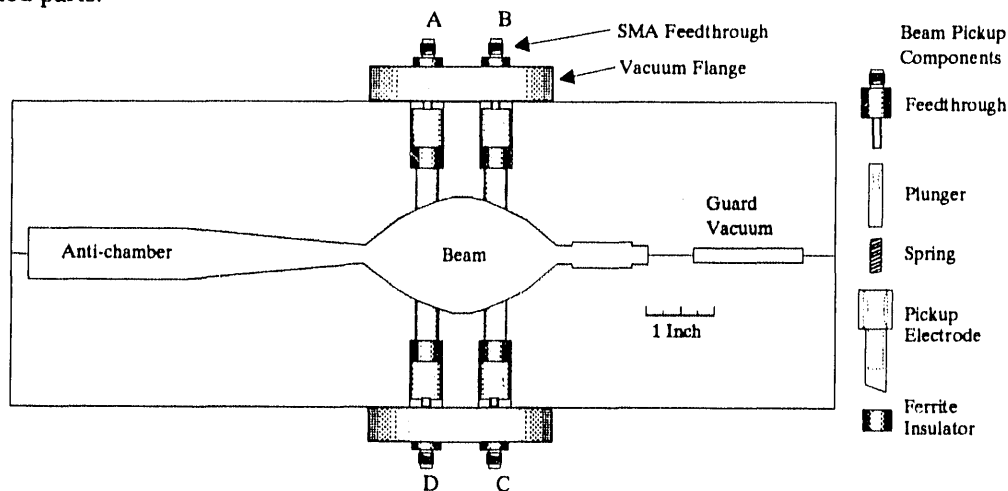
Cross section of ALS storage ring BPM buttons with exploded view of button parts. Shaded area is a very simplified representation of vacuum chamber.
